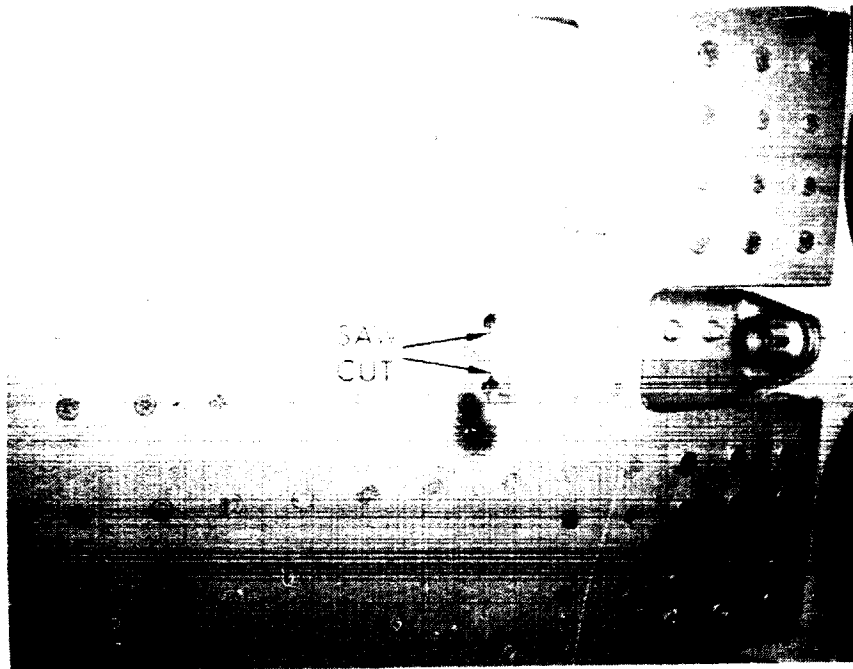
Saw Cut in Surface Panel - Wing Station 214 at Fastener Hole
